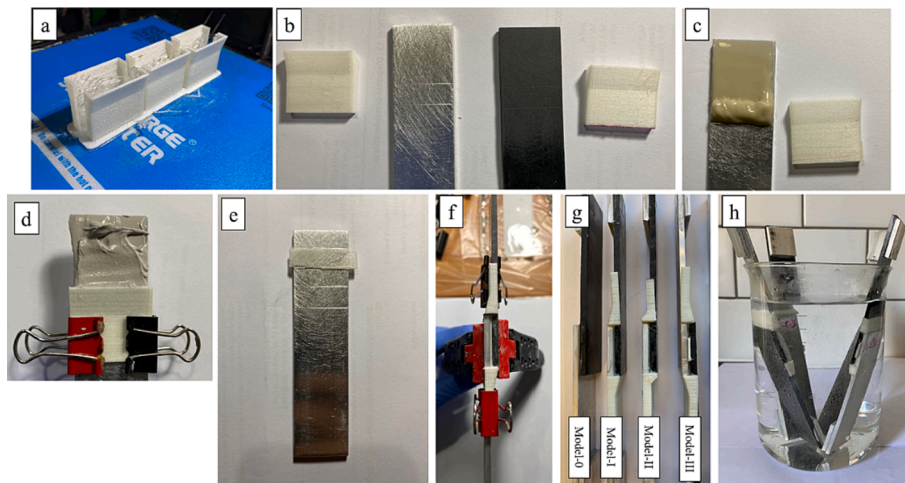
The process of manufacturing the geometrically modified adhesive-bonded joint: (a) printing PVA fixture (b) cleaning samples (c) applying adhesive (d-e) placing PVA fixture depending on the joint design (f-g) curing adhesive (h) dissolving PVA fixture.
